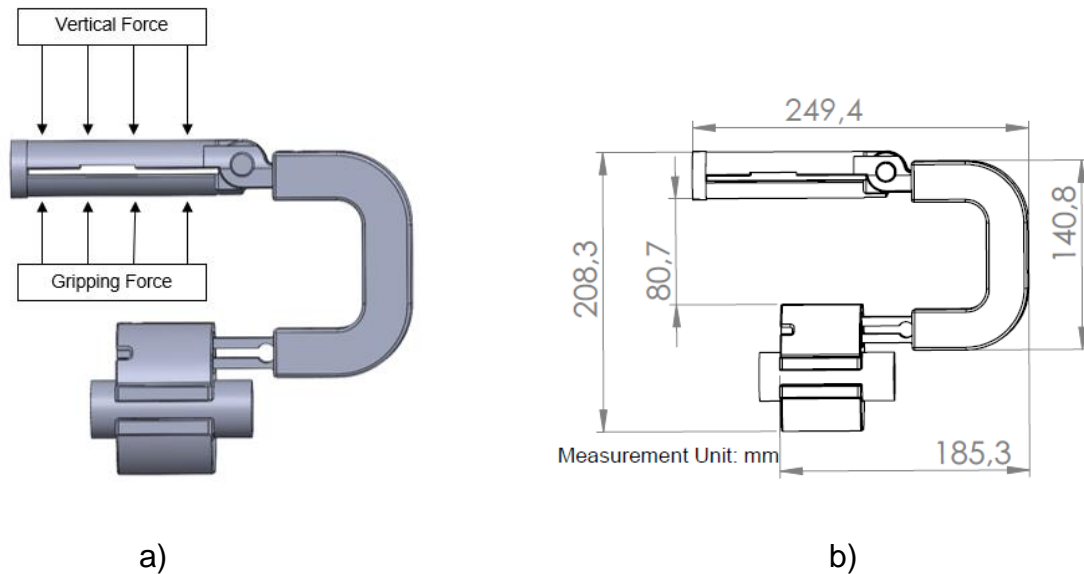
a) 3D drawing with the illustration of the forces applied. b) 2D drawing with the prototype dimensions.
